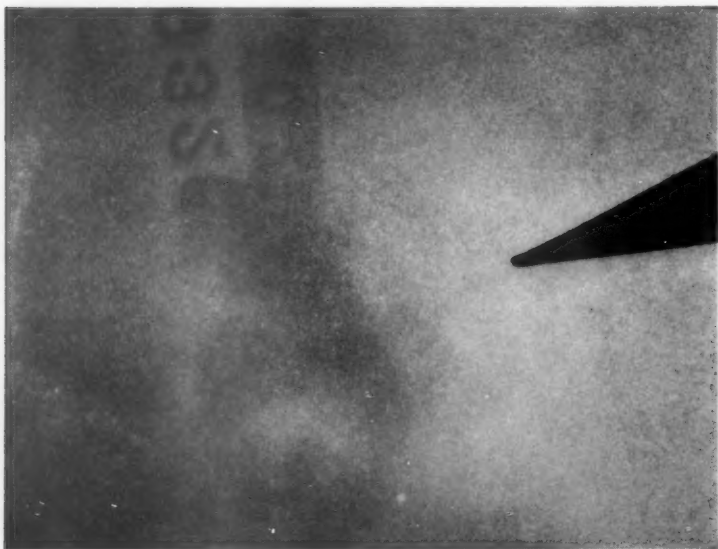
RADIOGRAPH OF WELD SHOWN IN FIG. 4.
